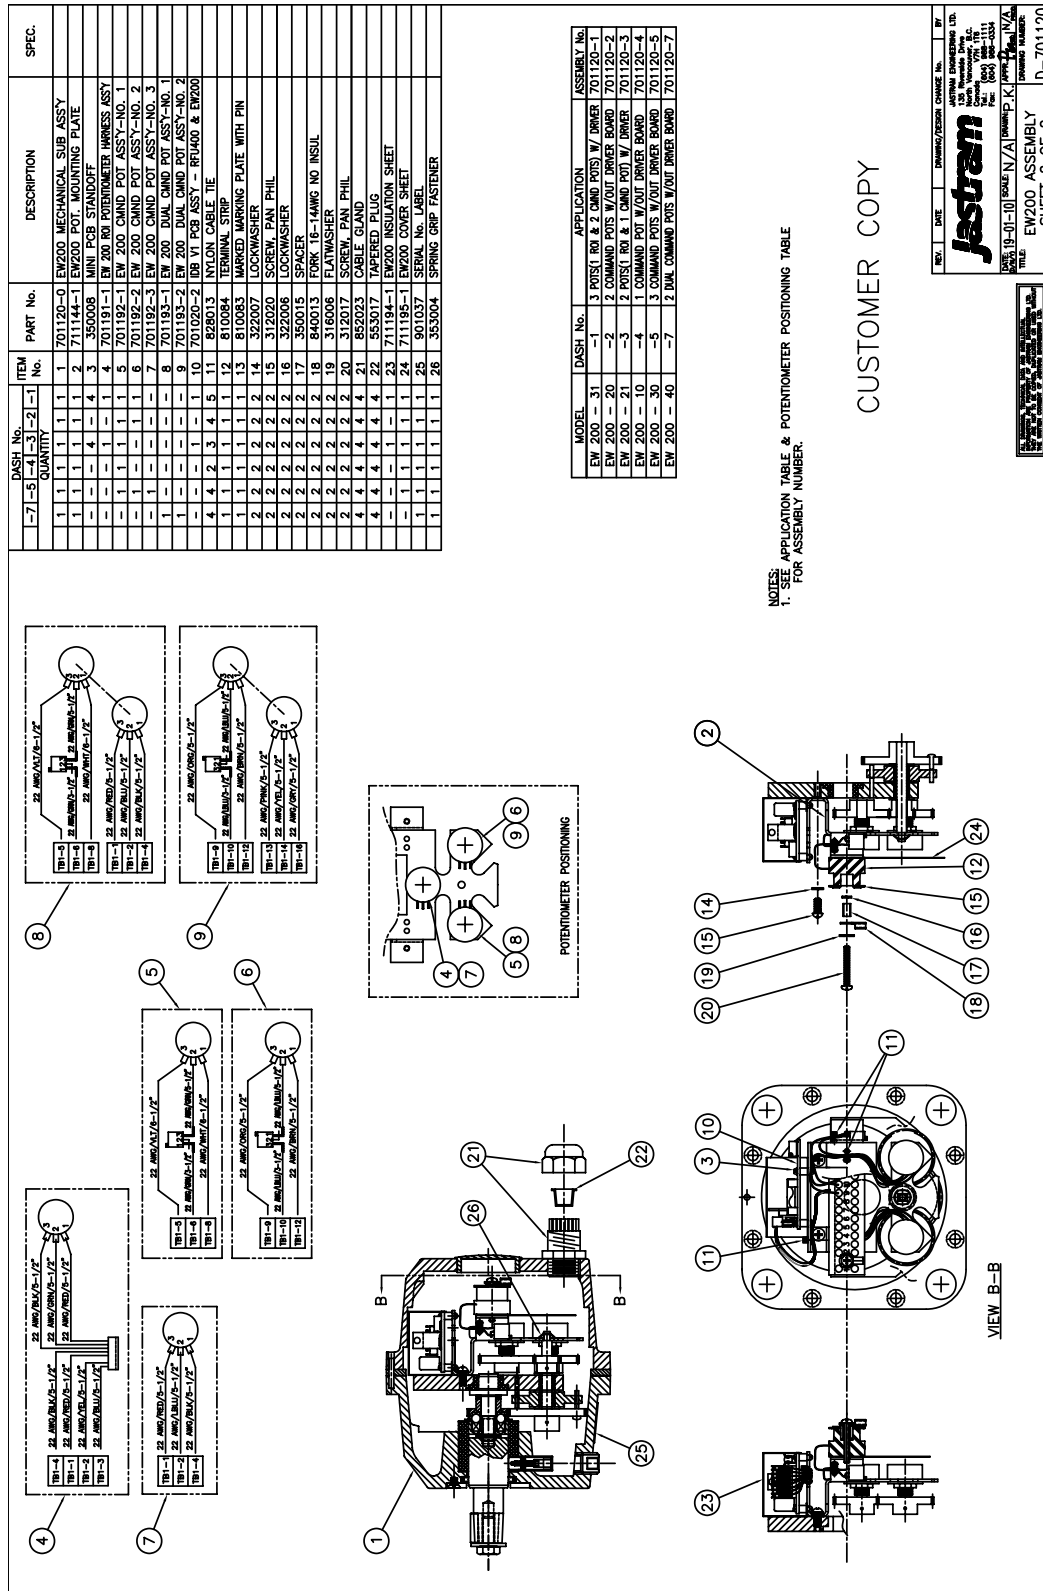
EW 200 Assembly (Sheet 1 of 2)
